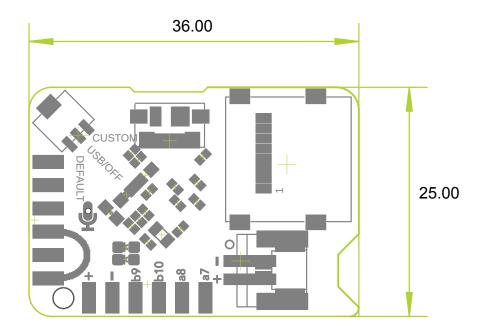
Mechanical drawing of µMoth showing dimensions in milimeters
